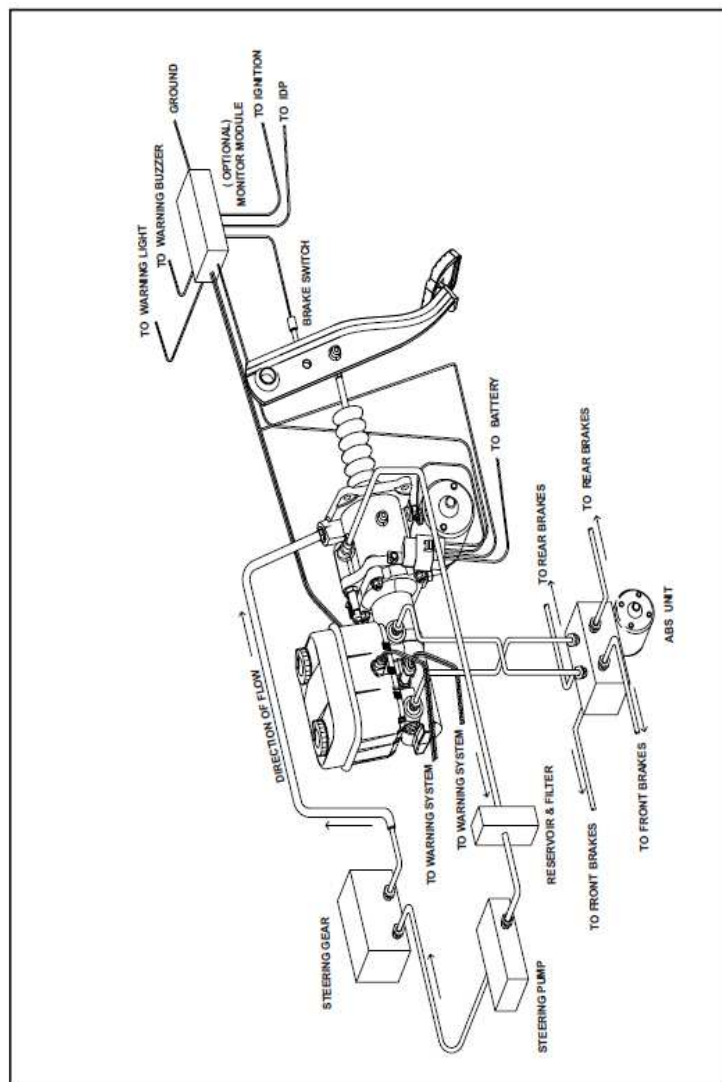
Typical Booster and Master Cylinder Assembly Installation in a Hydraulic Braking System
